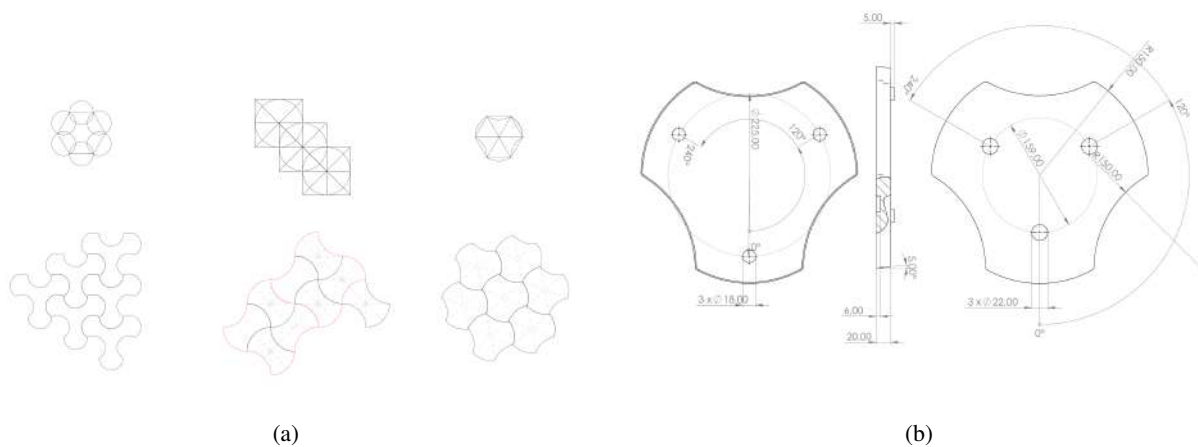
(a) First step in the form-finding process adopted for the design of the tile. (b) Technical drawing of the final tile design viewed from the top (left) side (center) and bottom (right). All the relevant dimensions are given in mm.
